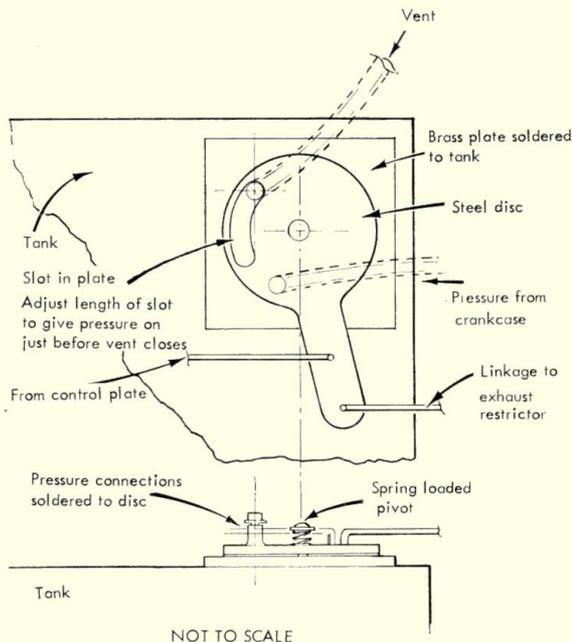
Pressure Cut-off Valve Mounted on Tank
